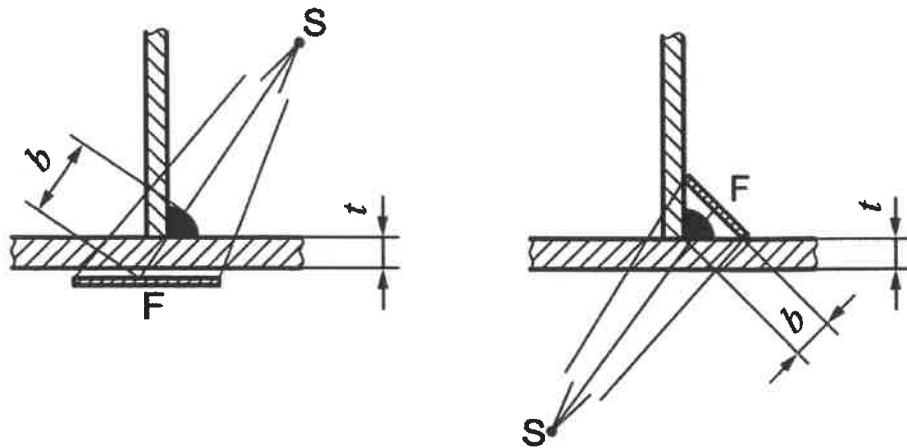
& 3; Penetration of fillet welds / Bild 2 & 3, Durchstrahlung von Kehlnähten
